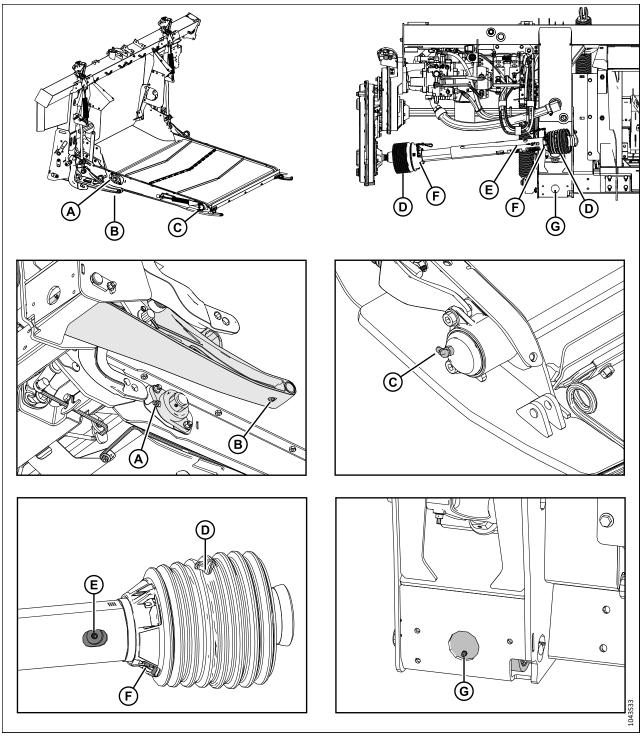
Float Module Grease Zerks – Feed Draper and Gearbox
